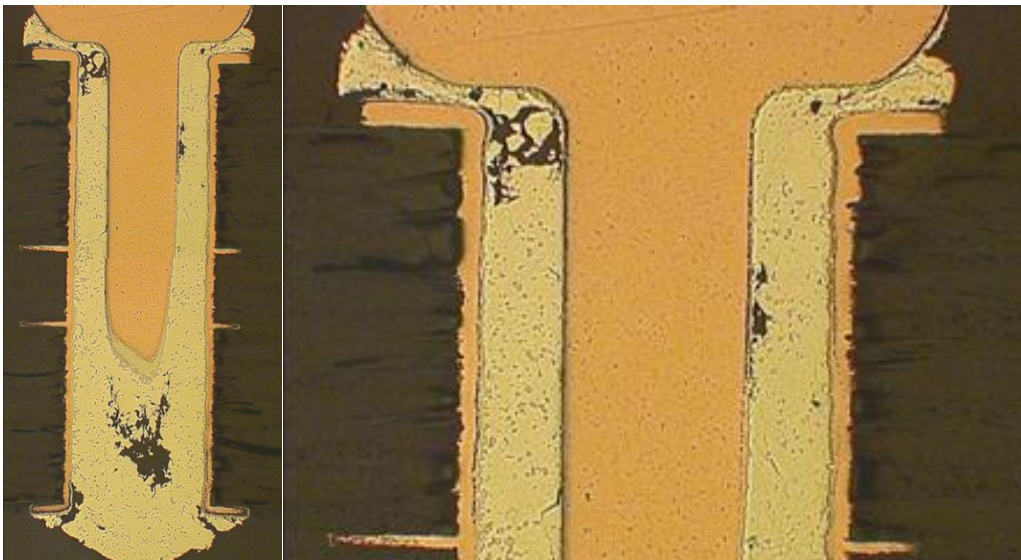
PDIP-20 Solder Joints, Board 168, Component U49, SN100C/Sn, DNF
